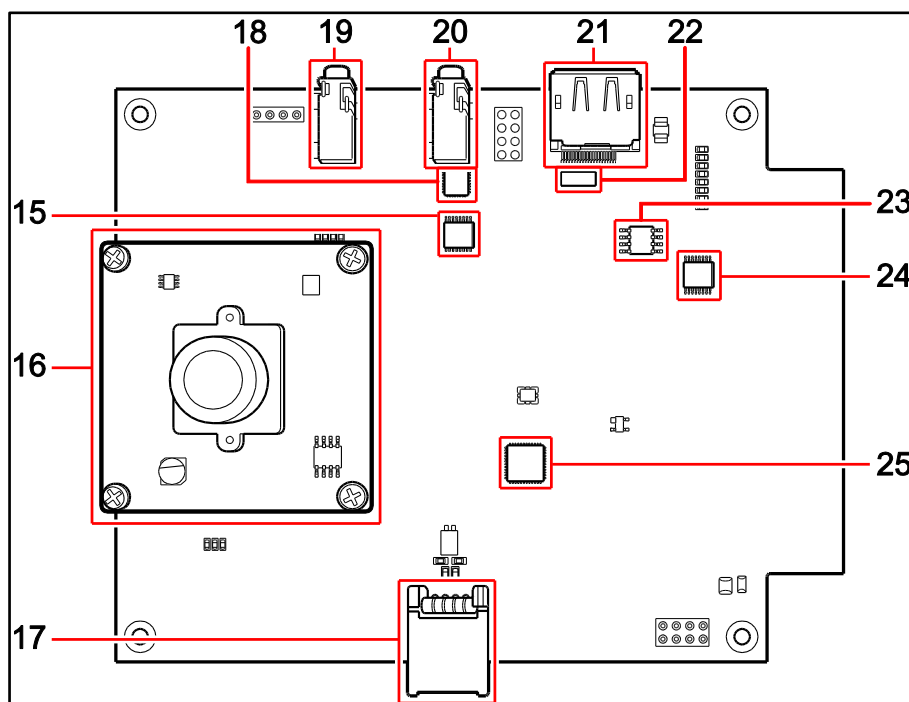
100BASE-T1 HSMC Card Layout (Bottom View)
